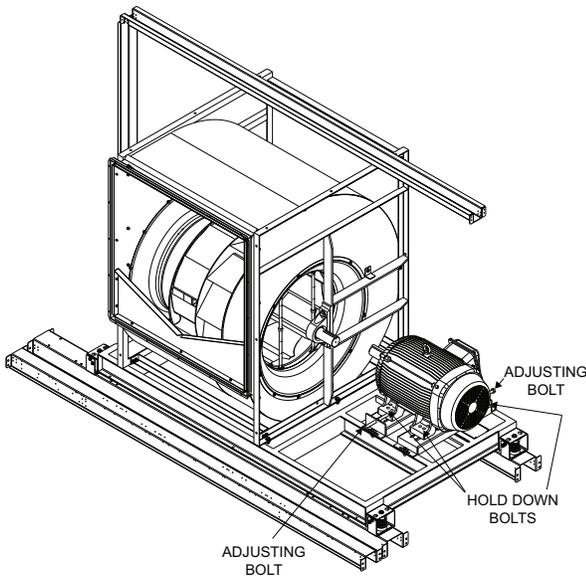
Supply and Power Exhaust Fan Motor Plate Adjustment
